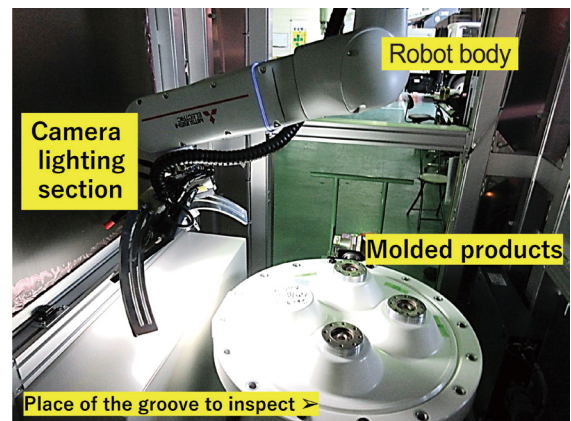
Exterior of the automatic inspection robot for molded parts
